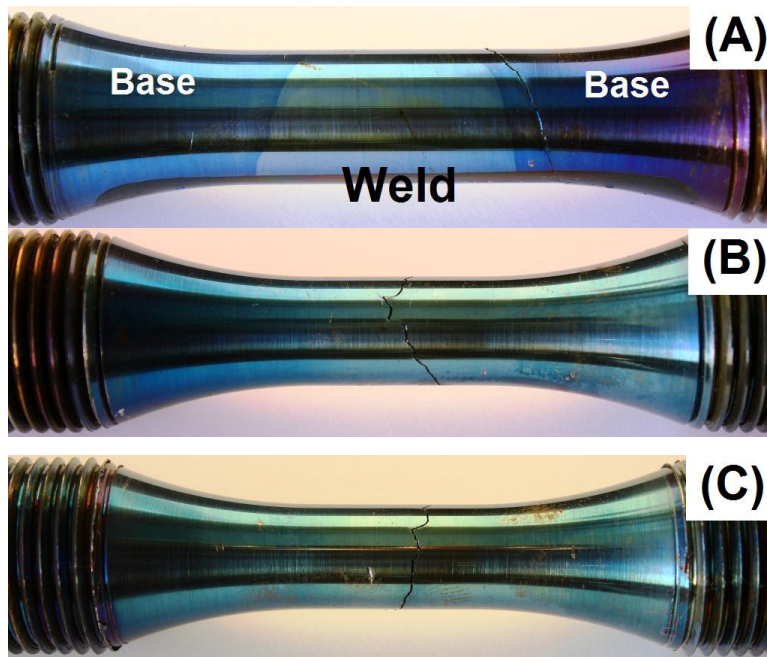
Photos of test fatigue specimens (A) HAZ (B) base (C) weld
